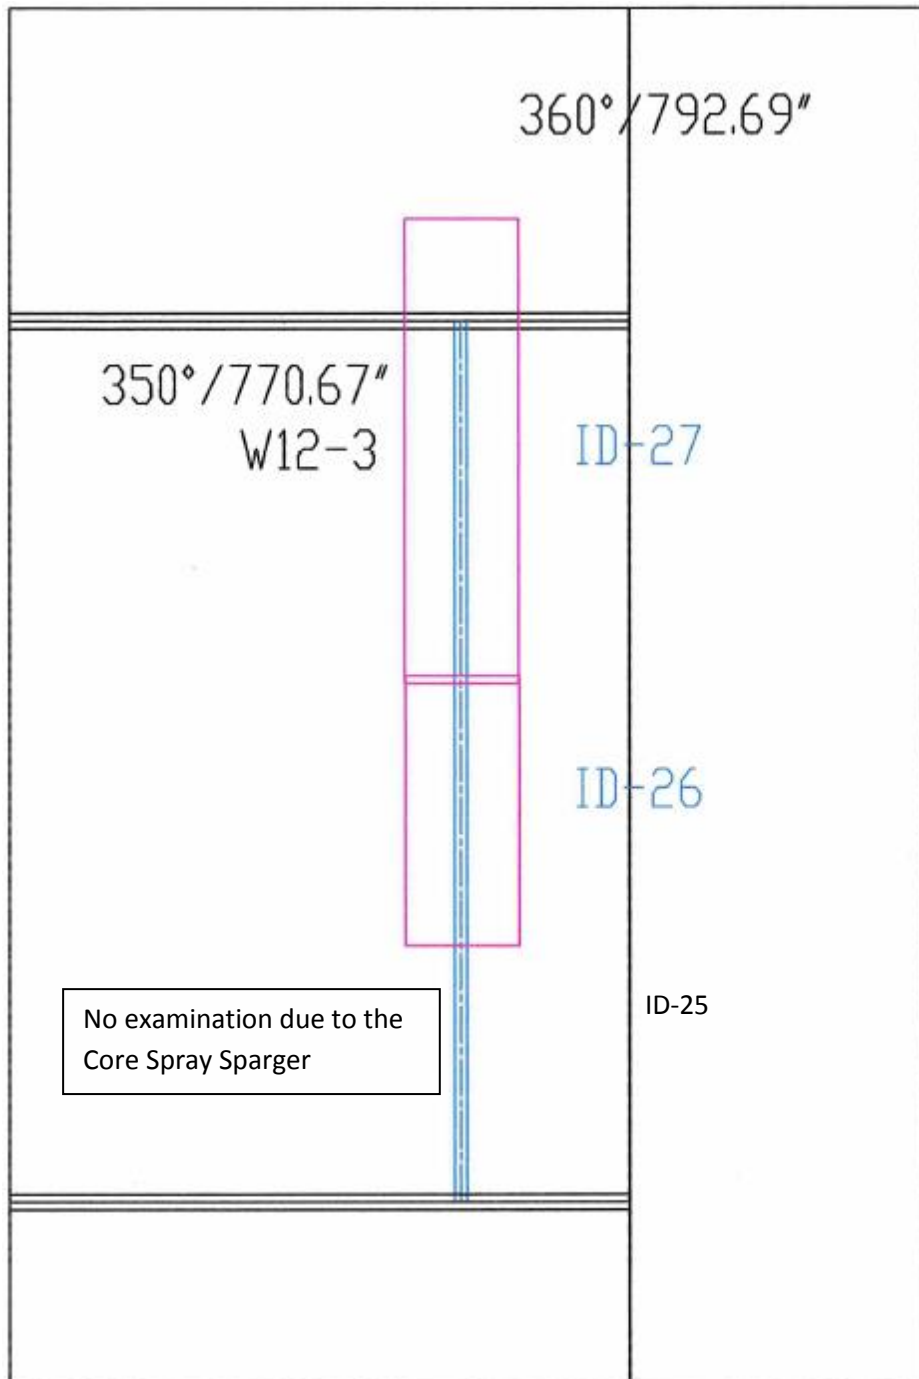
Weld RPV1-W12-3 (Weld Profile) 45° & 60° deg. Scans
